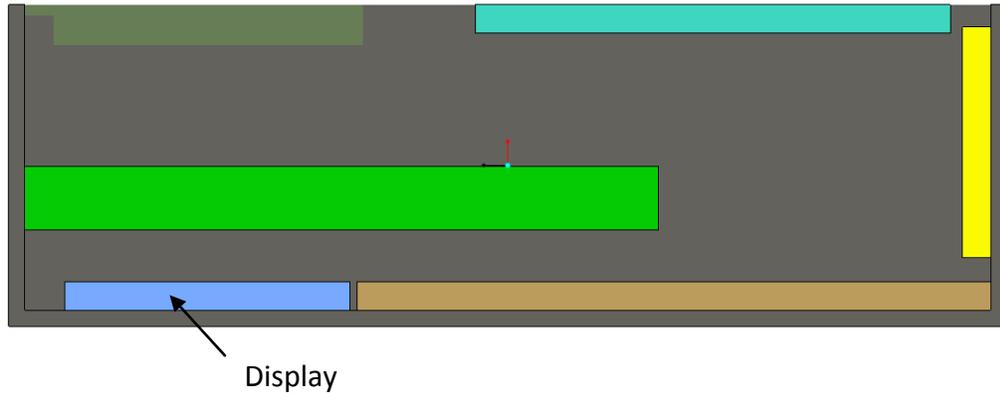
Cross Sectional View of Expected Main Unit. Cross Section Taken Along Plane Indicated in Figure 56. Mounting Hardware Not Shown
